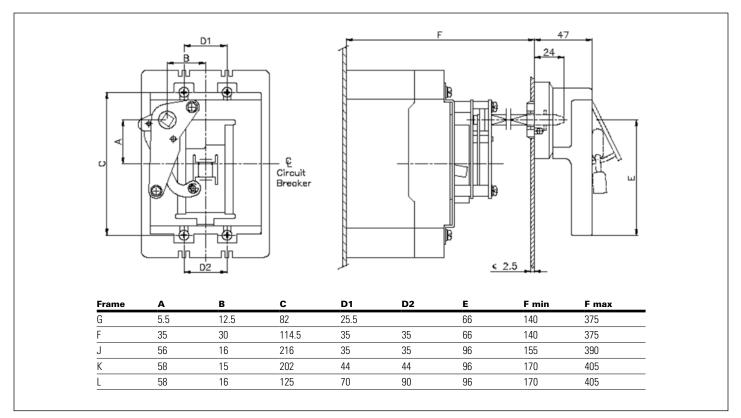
Dimension of the Handle Mechanism, Universal Handle Shown (Dimensions in mm)
